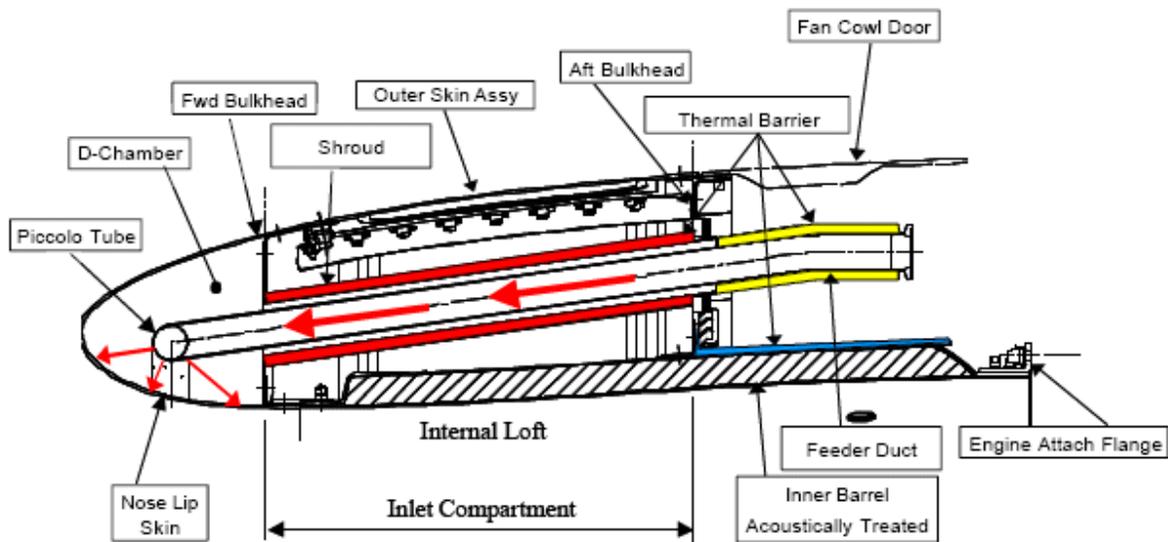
3-15-02 - CROSS-SECTION OF THE SIDE ENGINE AIR INLET WITH ANTI-ICE SYSTEM COMPONENTS
